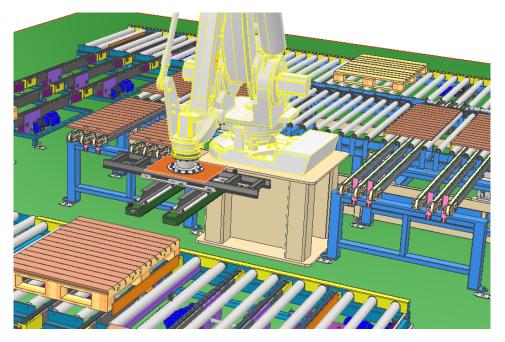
Wooden elements entering in the sanding machine by the roller conveyor.
